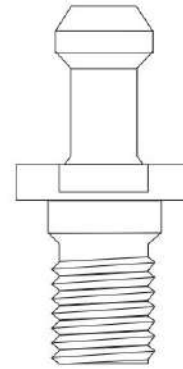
Retention knob as used in the top of tool assembly for clamping and releasing purpose as used in a CNC machining centre
